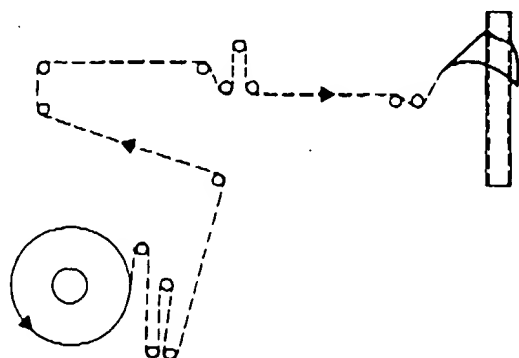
Typical film feed path through a vertical form/fill/seal machine.
